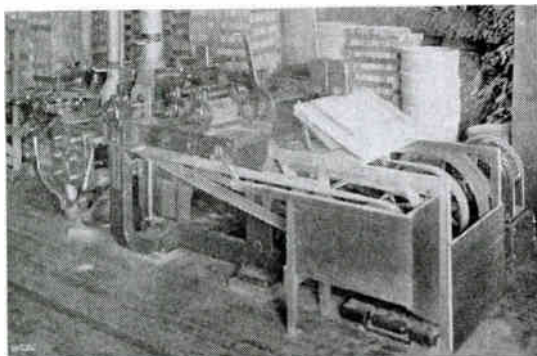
10 H.P. Induction Motor Direct Connected to Driving Shaft of Four-Sided Moulder
